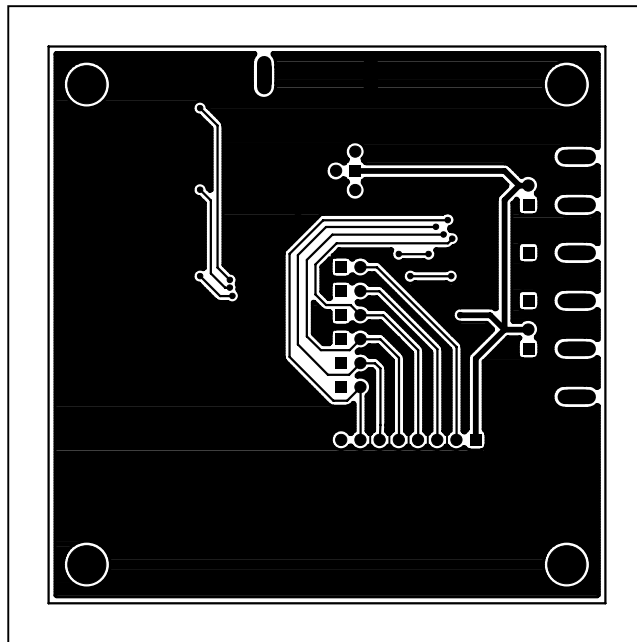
MAX5389 EV Kit PCB Layout—Solder Side
